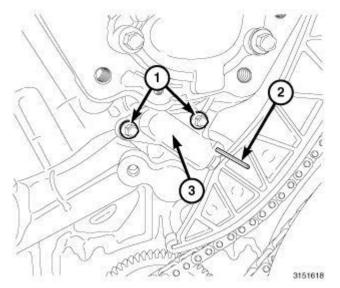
Left Timing Chain Tensioner, Pin & Bolt Courtesy of CHRYSLER GROUP, LLC
